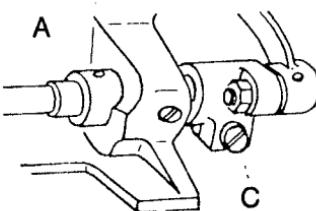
To adjust the timing of Models 782, 793, 804 and 970, simply rotate the hand wheel toward you with the presser foot up until the very bottom of the stroke is reached and the needle has risen to form a thread loop, loosen screw C, rotate shaft A to turn the shuttle until the hook point is opposite the center line of the needle and engages the thread loop and tighten screw C. With this done, the timing is technically correct, and missed stitches will be caused by other factors.
